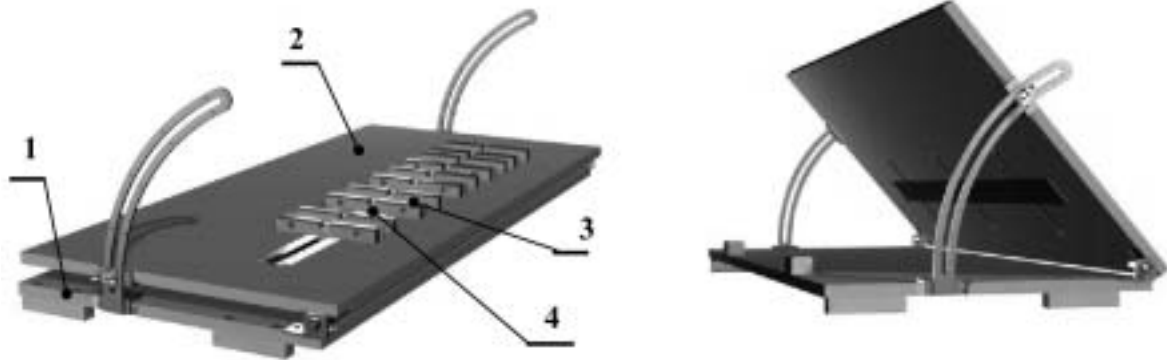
Prototype instrumentation of cyclic multi-spindle drilling machine
